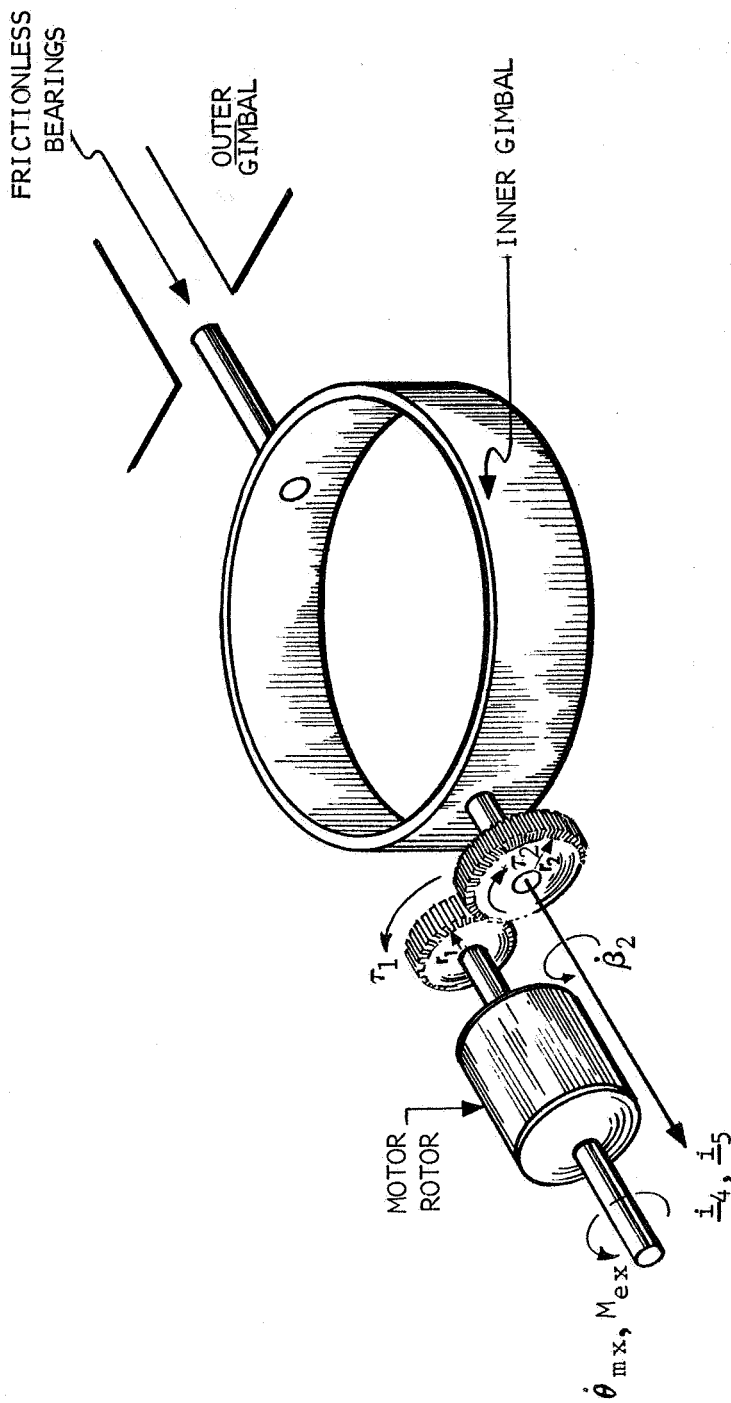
INNER GIMBAL TORQUE MOTOR
